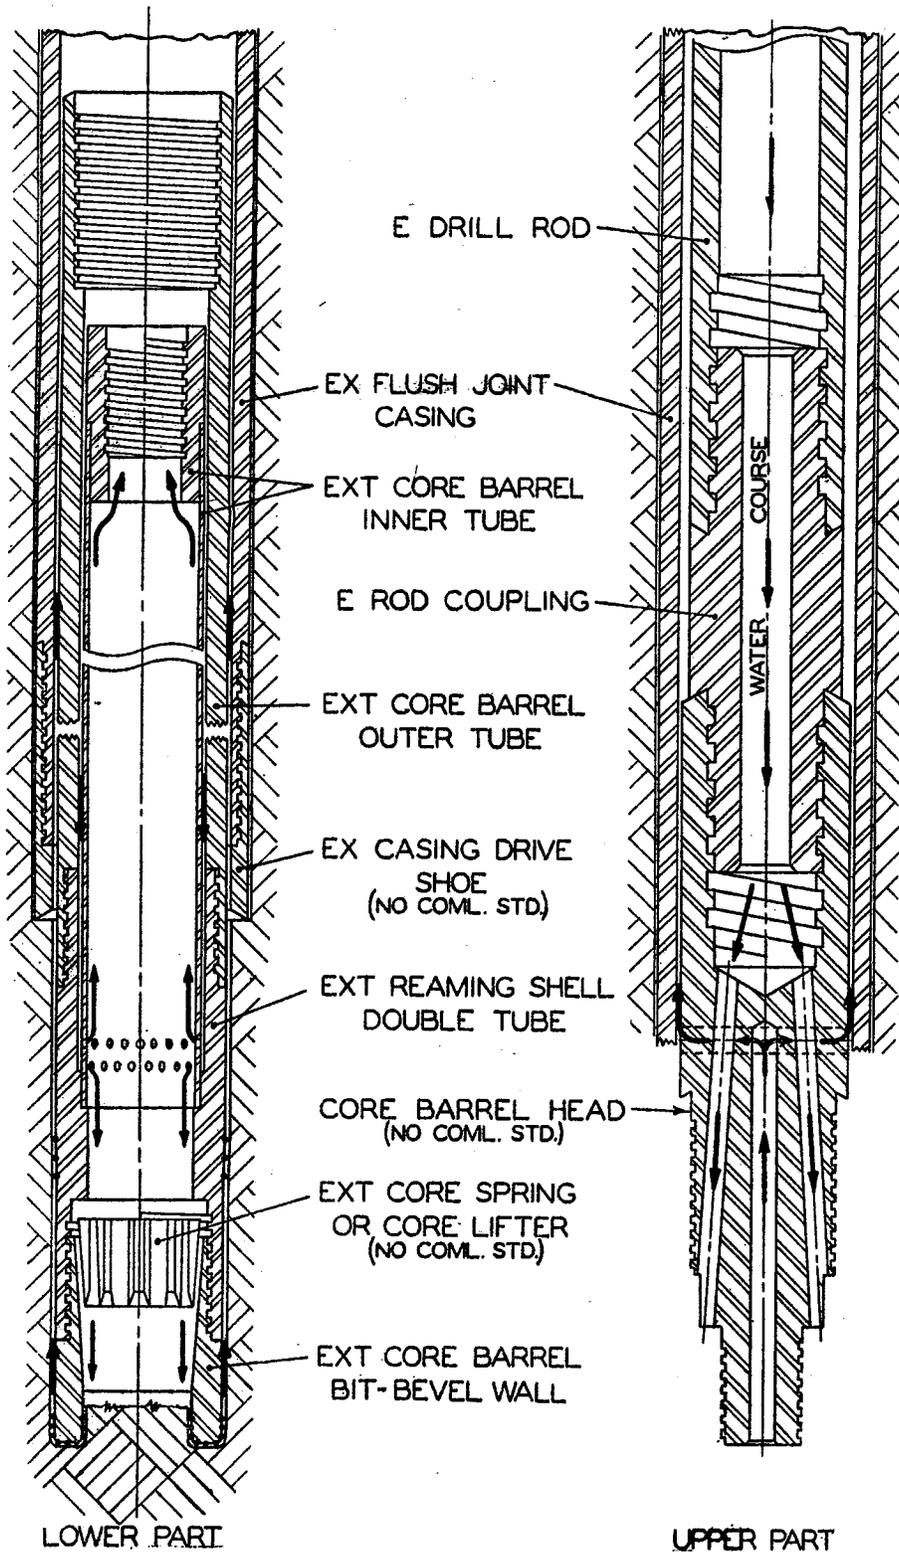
Cross section through rigid-type double-tube core barrel assembly, EXT.
